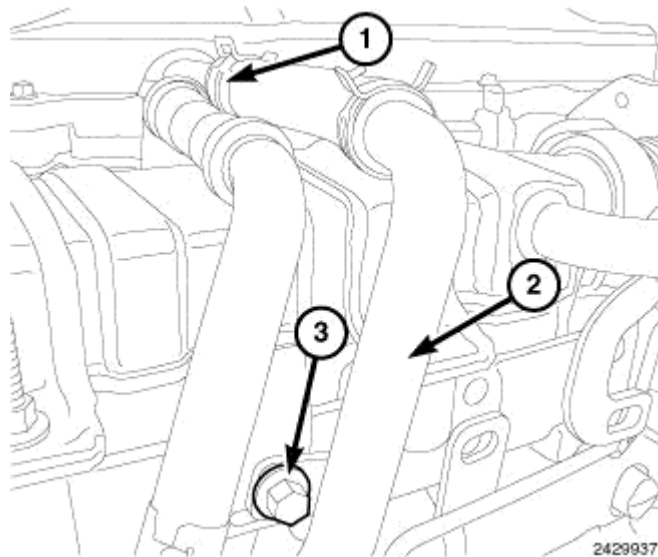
Transmission Fill Tube Retaining Nut
